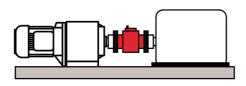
Location of a torque measuring shaft in the shaft assembly between the drive and the driven machinery
